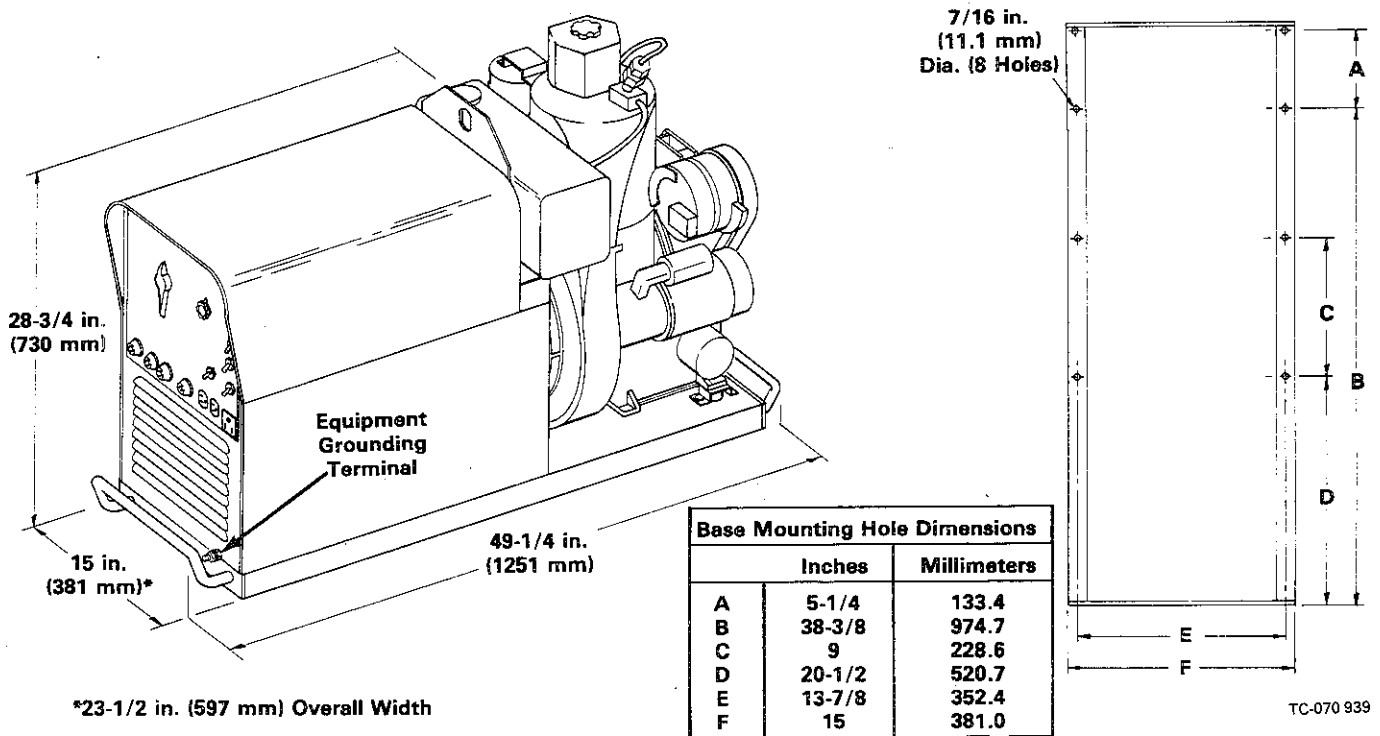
2. Dimensional Drawing And Base Mounting Hole Layout
